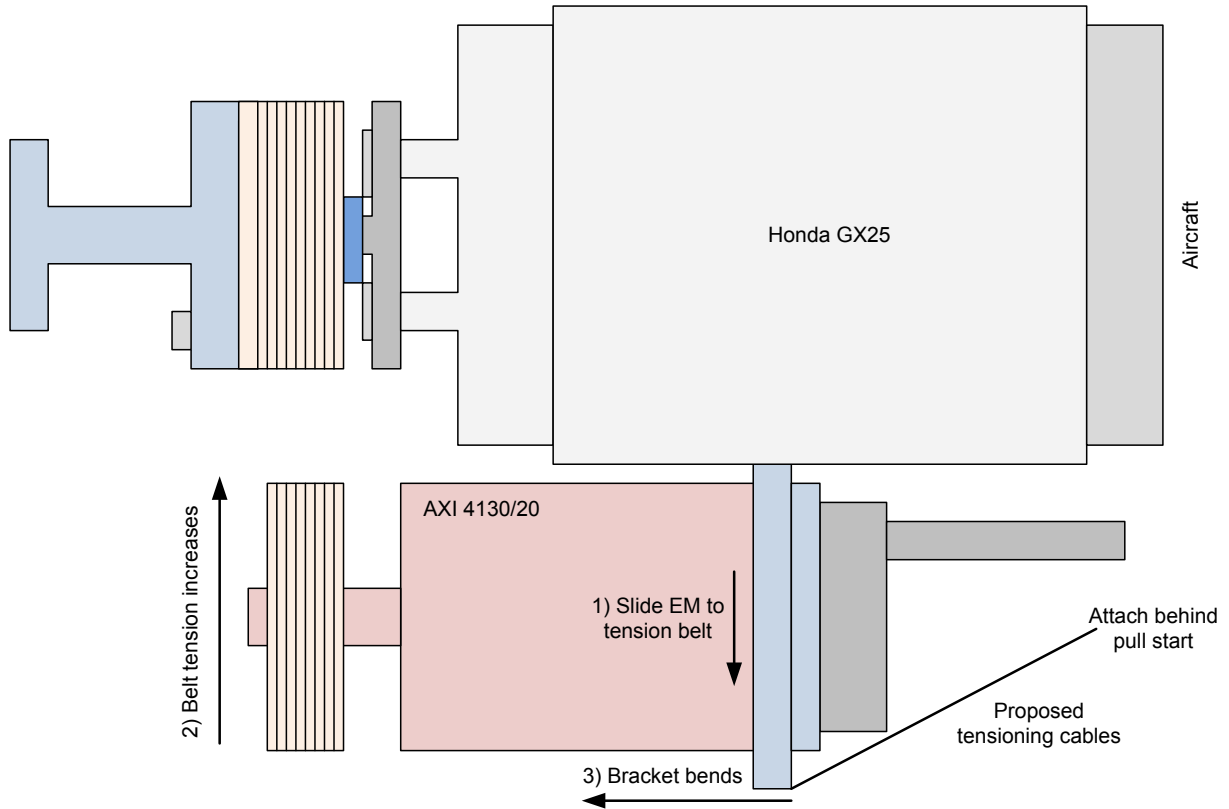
Proposed tension cables to prevent bracket from bending and causing the 6 Rib belt to come off of the EM pulley
